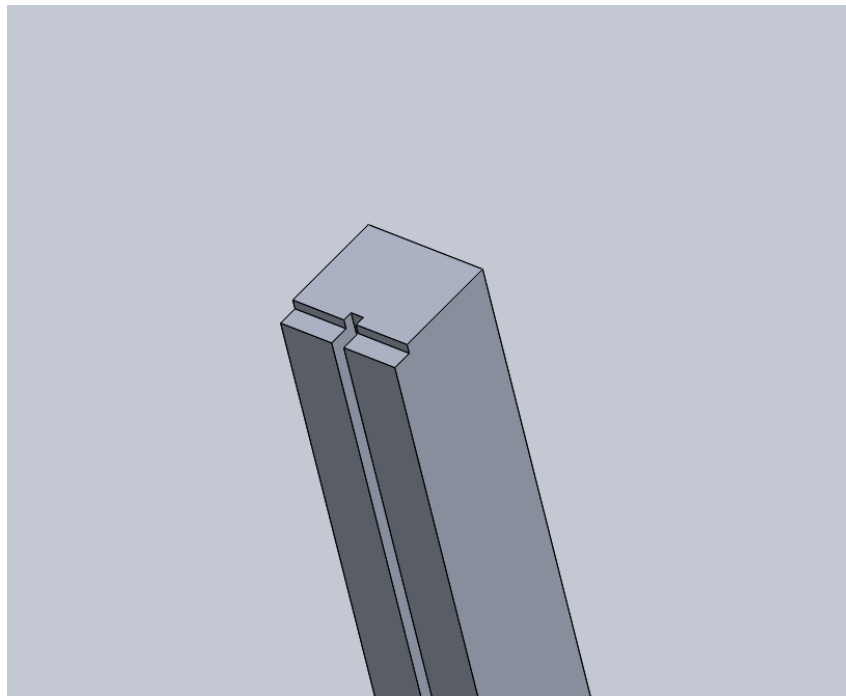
One of the drawer supports with the fitting groove facing inside.
